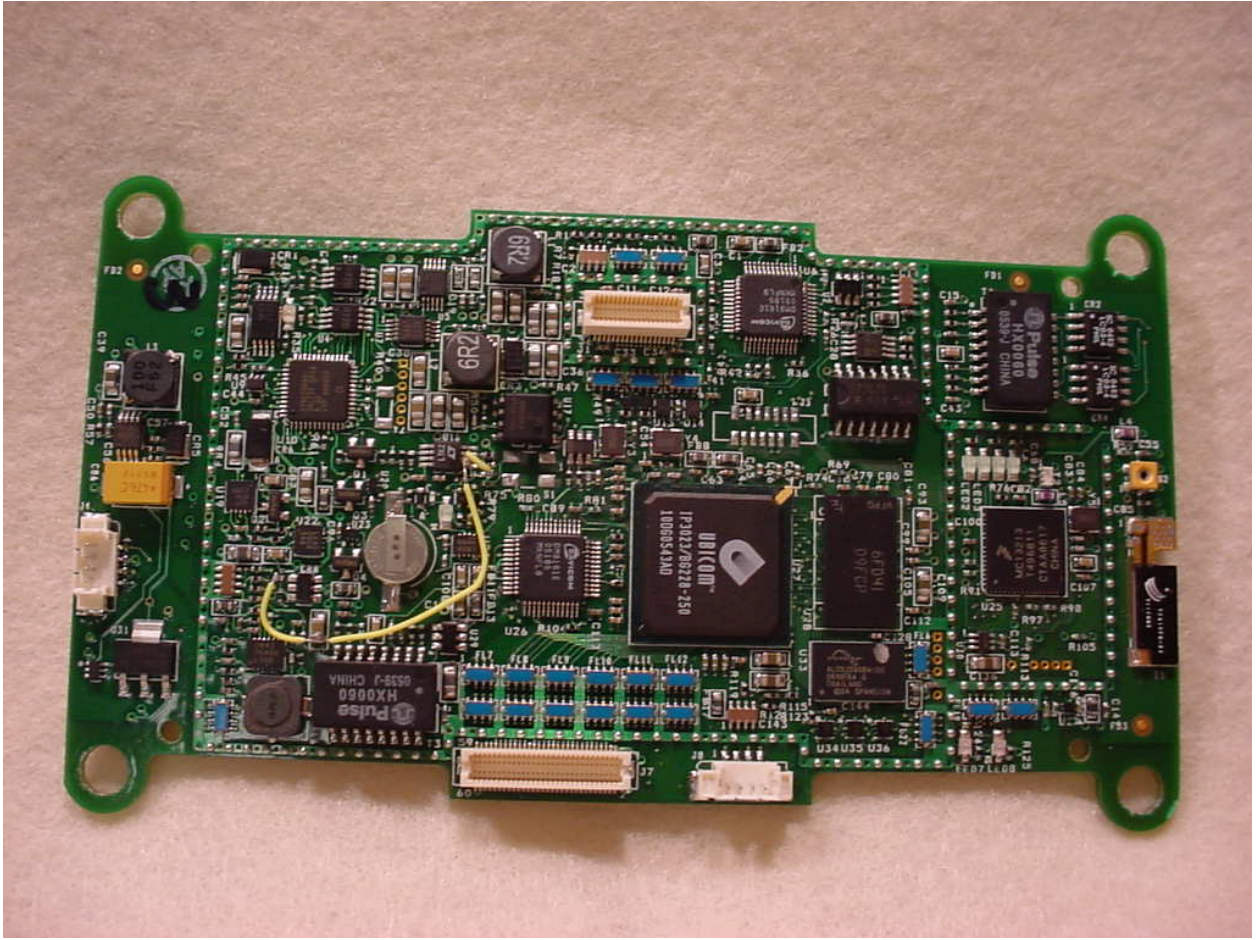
Internal – Cell Relay Core Board Front (No Shield)
